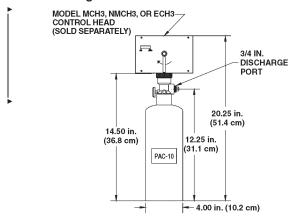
Model PAC-10 Pneumatic Actuating Cylinder.
